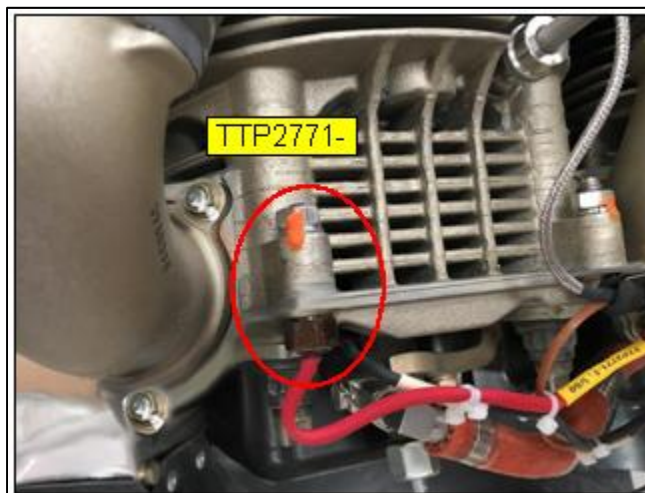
Cylinder assembly heating element located in baffle pad nearest to intake tube.
